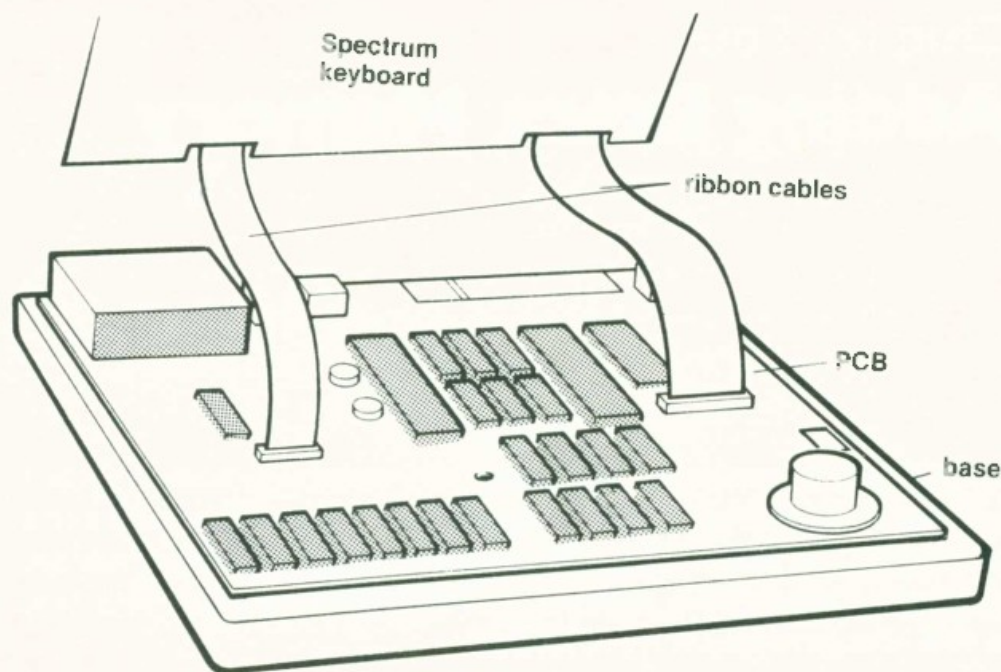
Fitting the new ribbon cables to the Spectrum PCB.
